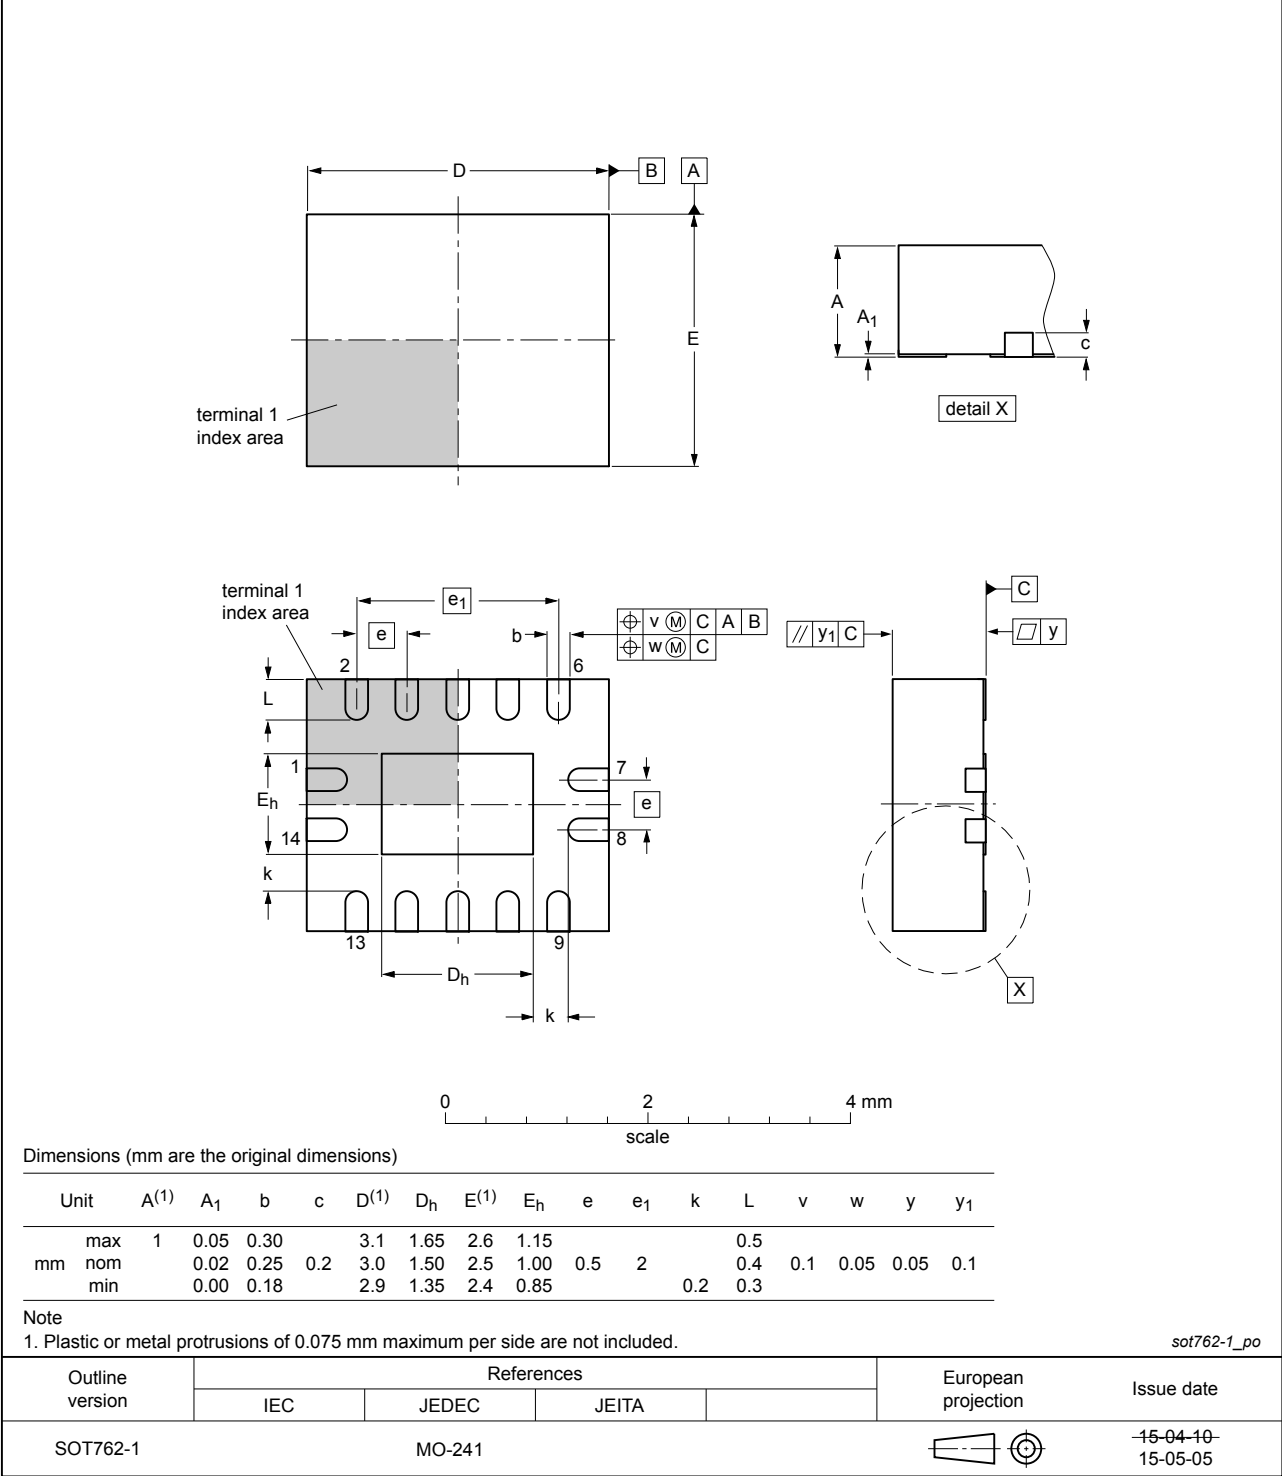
Package outline SOT762-1 (DHVQFN14)
